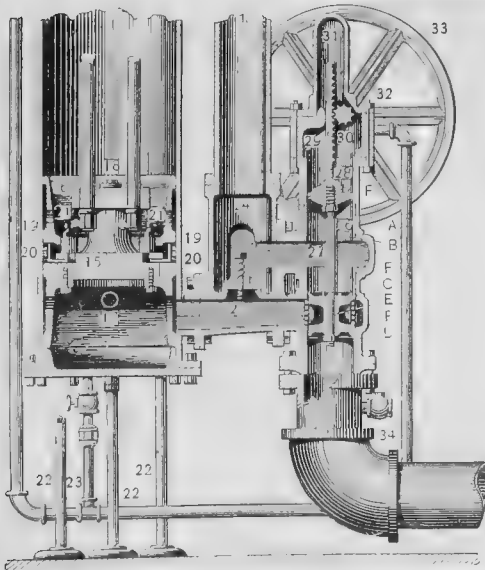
Section of hydraulic-elevator cylinder and valves.
